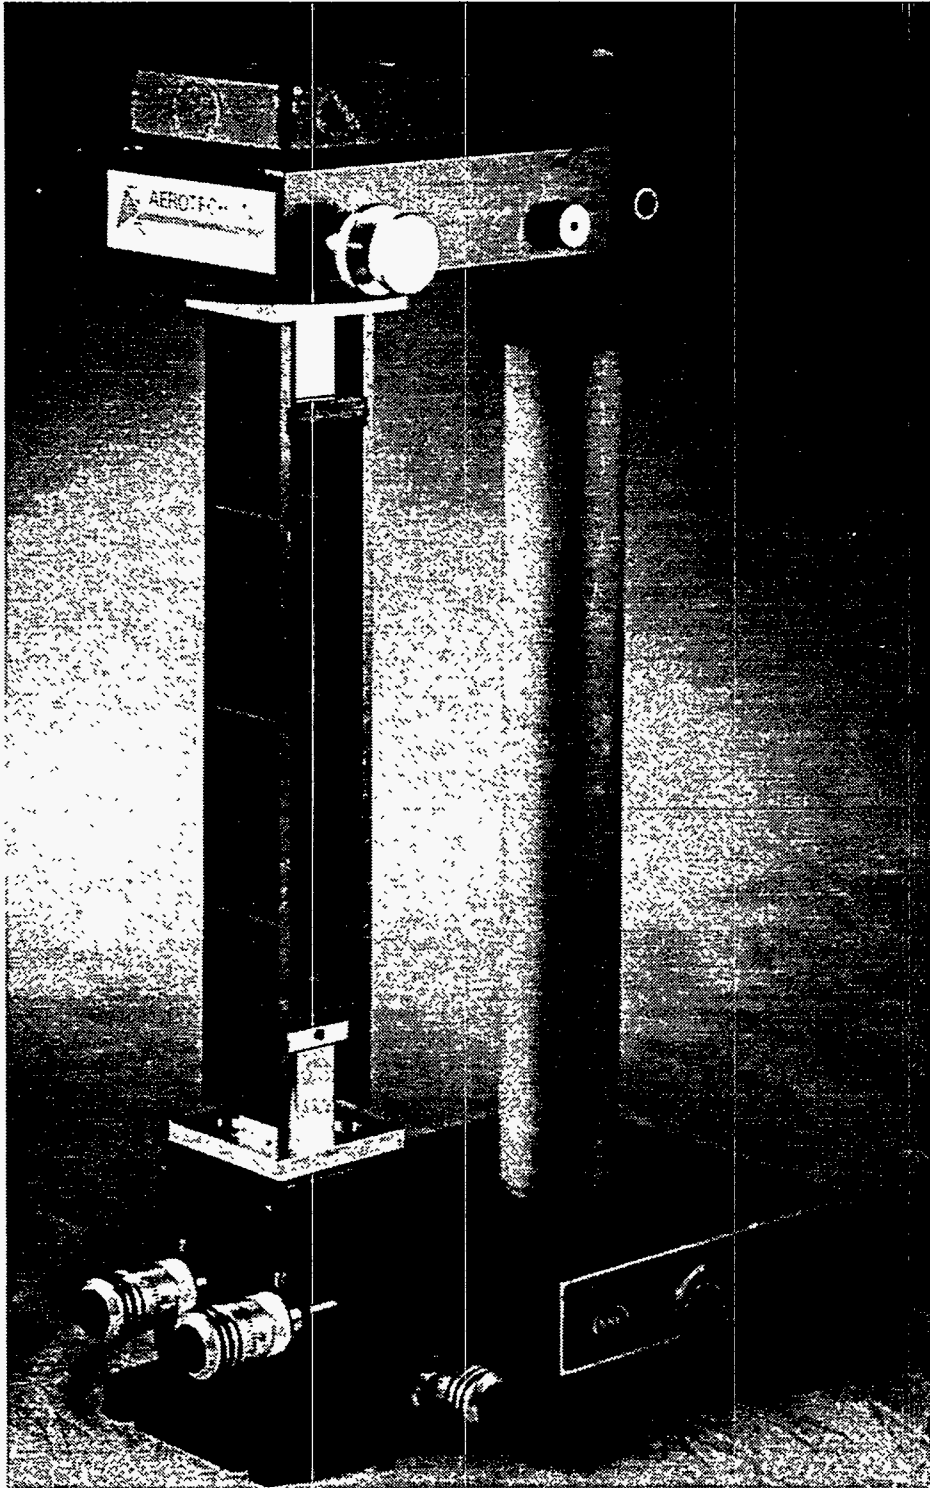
Mechanical fixture used to test prototype silicon ladder assemblies.
